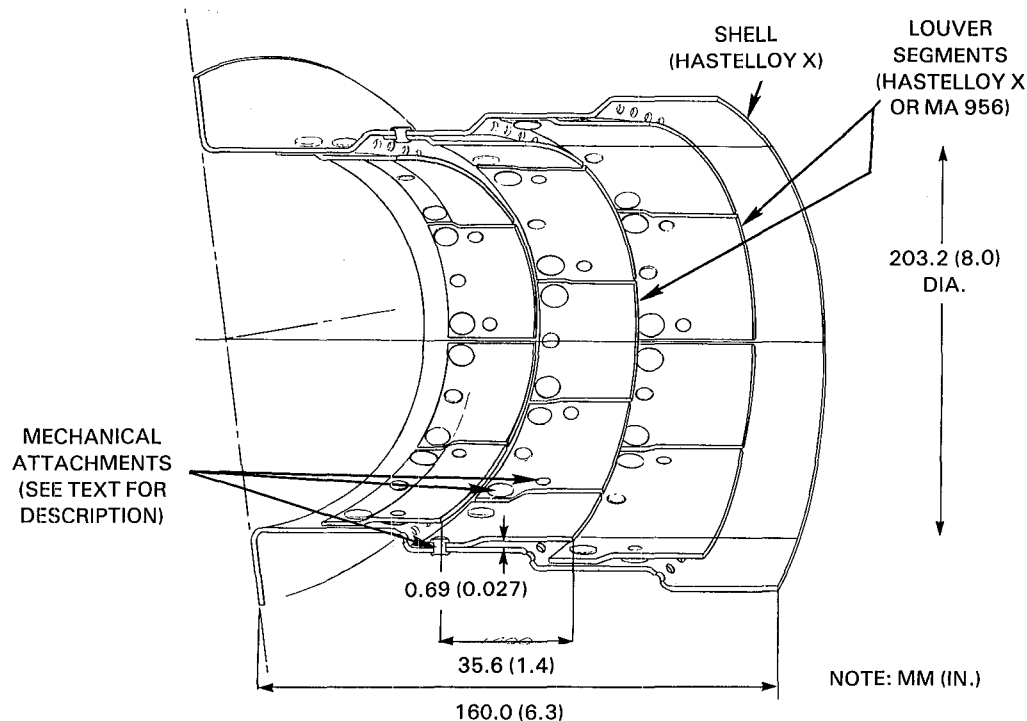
Film Cooled Mechanically Attached Louver Thermal Fatigue Test Component Design
